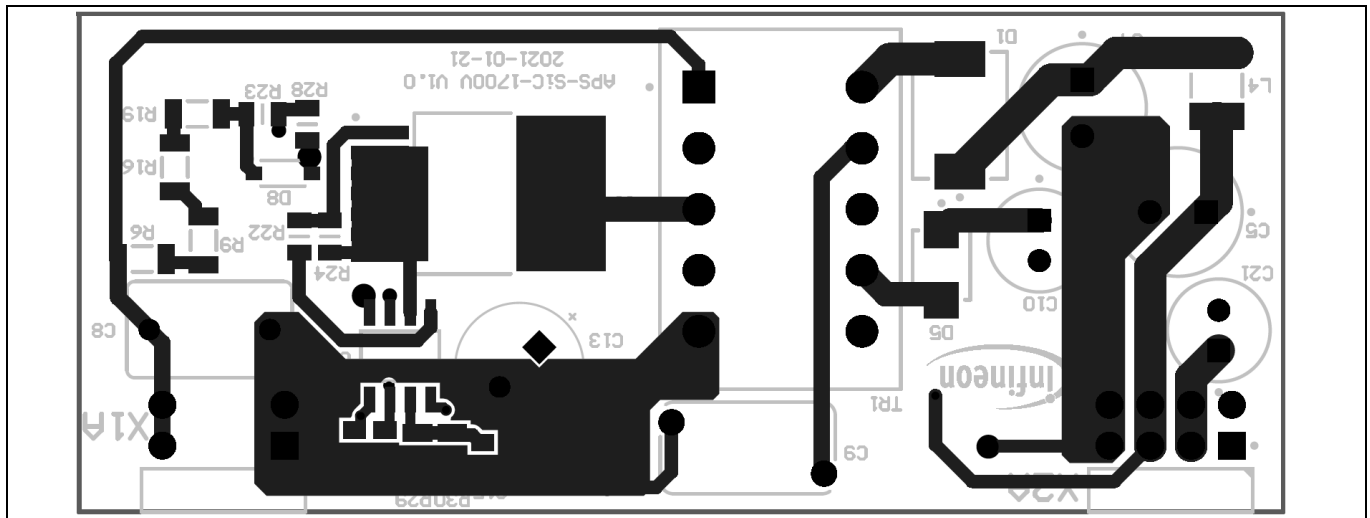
Auxiliary power supply circuitry layout of the EVAL-M1-IR2214 – top view
